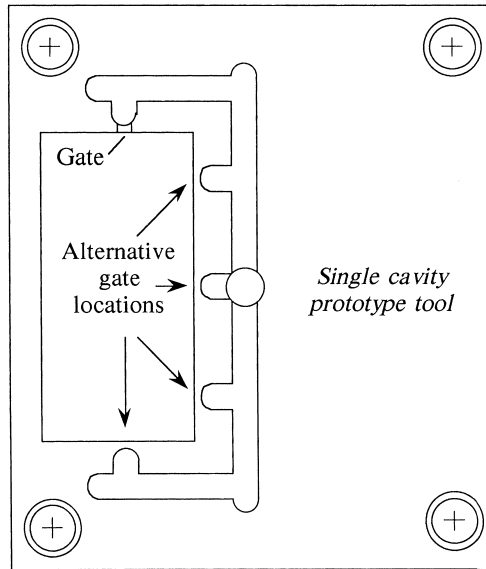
Molded prototype parts should be gated in the same manner that is planned for the production parts
